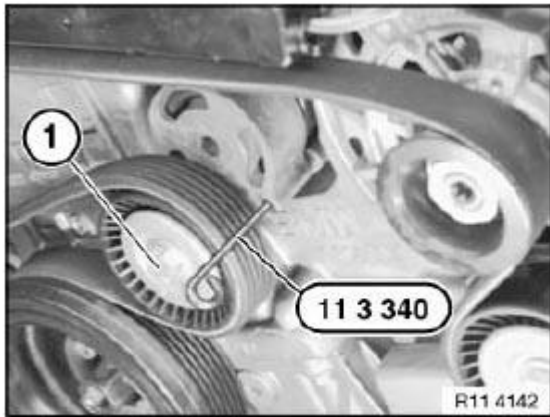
Special Tool (11 3 340) And Belt Tensioner
